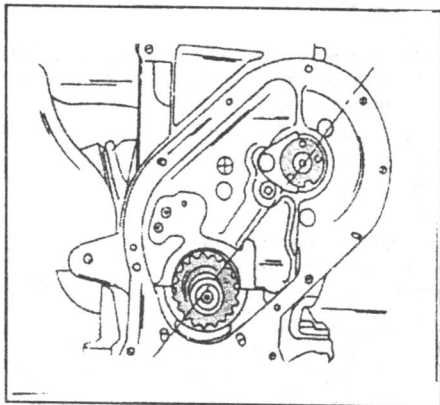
Rotate the crankshaft and the camshaft until the two timing marks are aligned as shown.
